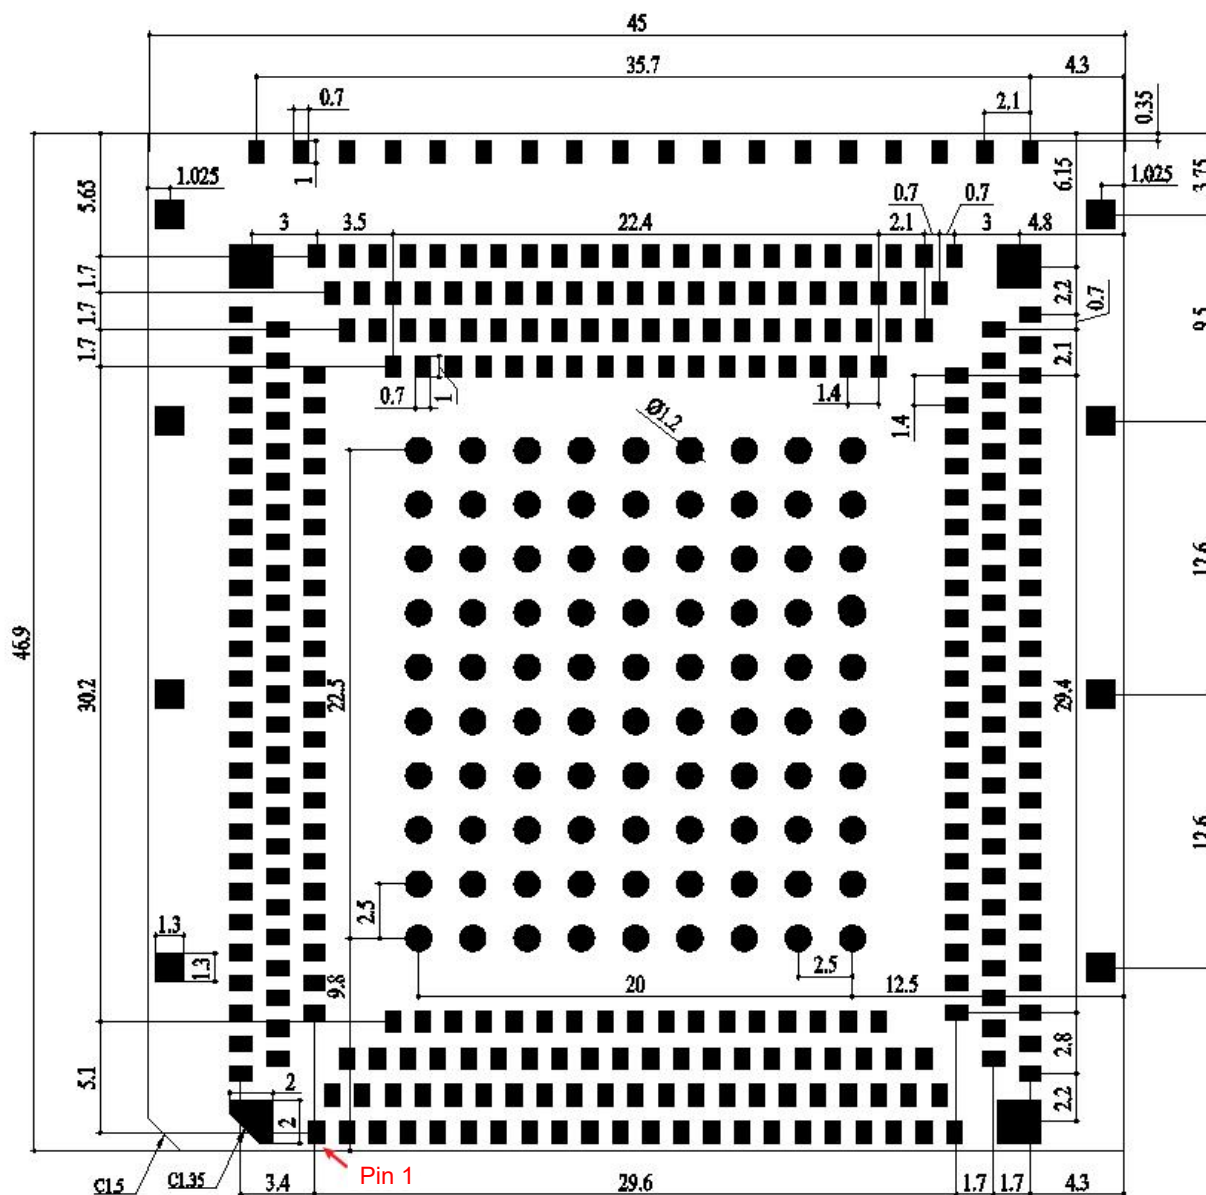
Module Bottom Dimensions (Bottom View, Unit: mm)
